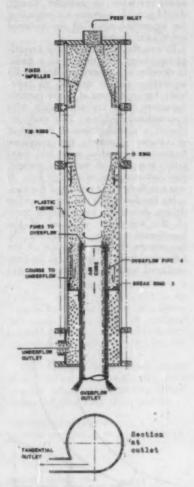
Assembly drawing of $5\frac{1}{2}$ -in. fixed-impeller separator.
